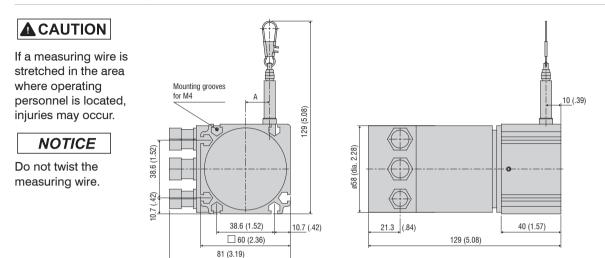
Dimensional drawing WDS- ... - P60 - BH - CO/PB/PN/ENIP/CAT, dimensions in mm (inches)
